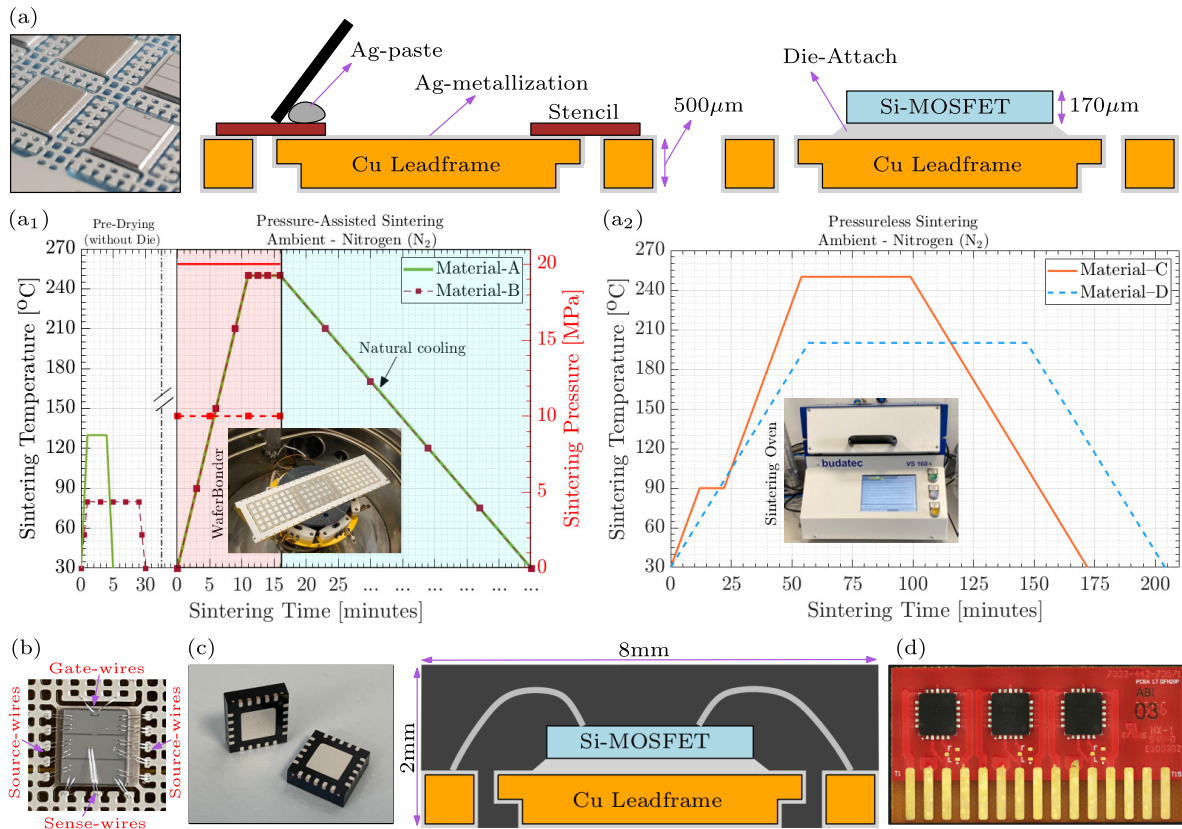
(a) Stencil printing and sintering of the die to the leadframe. (a1) Pressure-assisted sintering process. (a2) Pressureless sintering process. (b) Electrical connections through wire bonds. (c) Encapsulated, singulated, and laser-marked PQFN packages. (d) Packages soldered to test boards.
